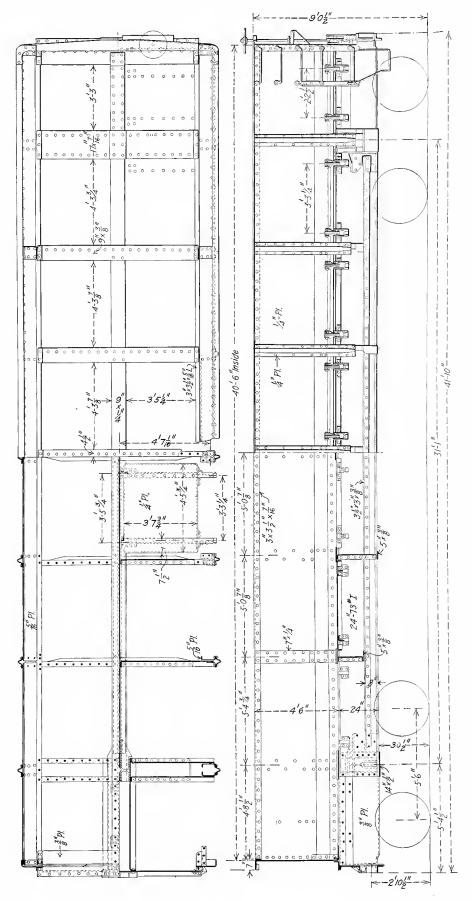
All-Steel 50-Ton Capacity Drop Bottom Side Dump Gondola Car. See also Fig. 328. Builder, Enterprise Railway Equipment Company.
